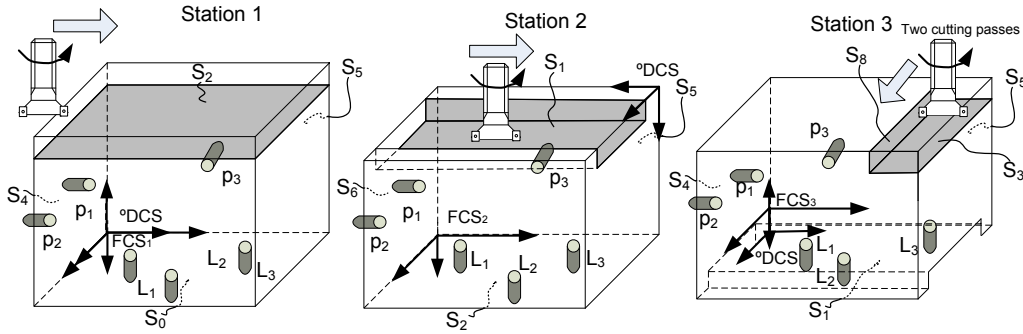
Case study. Part to be machined in a 3-station machining process.
